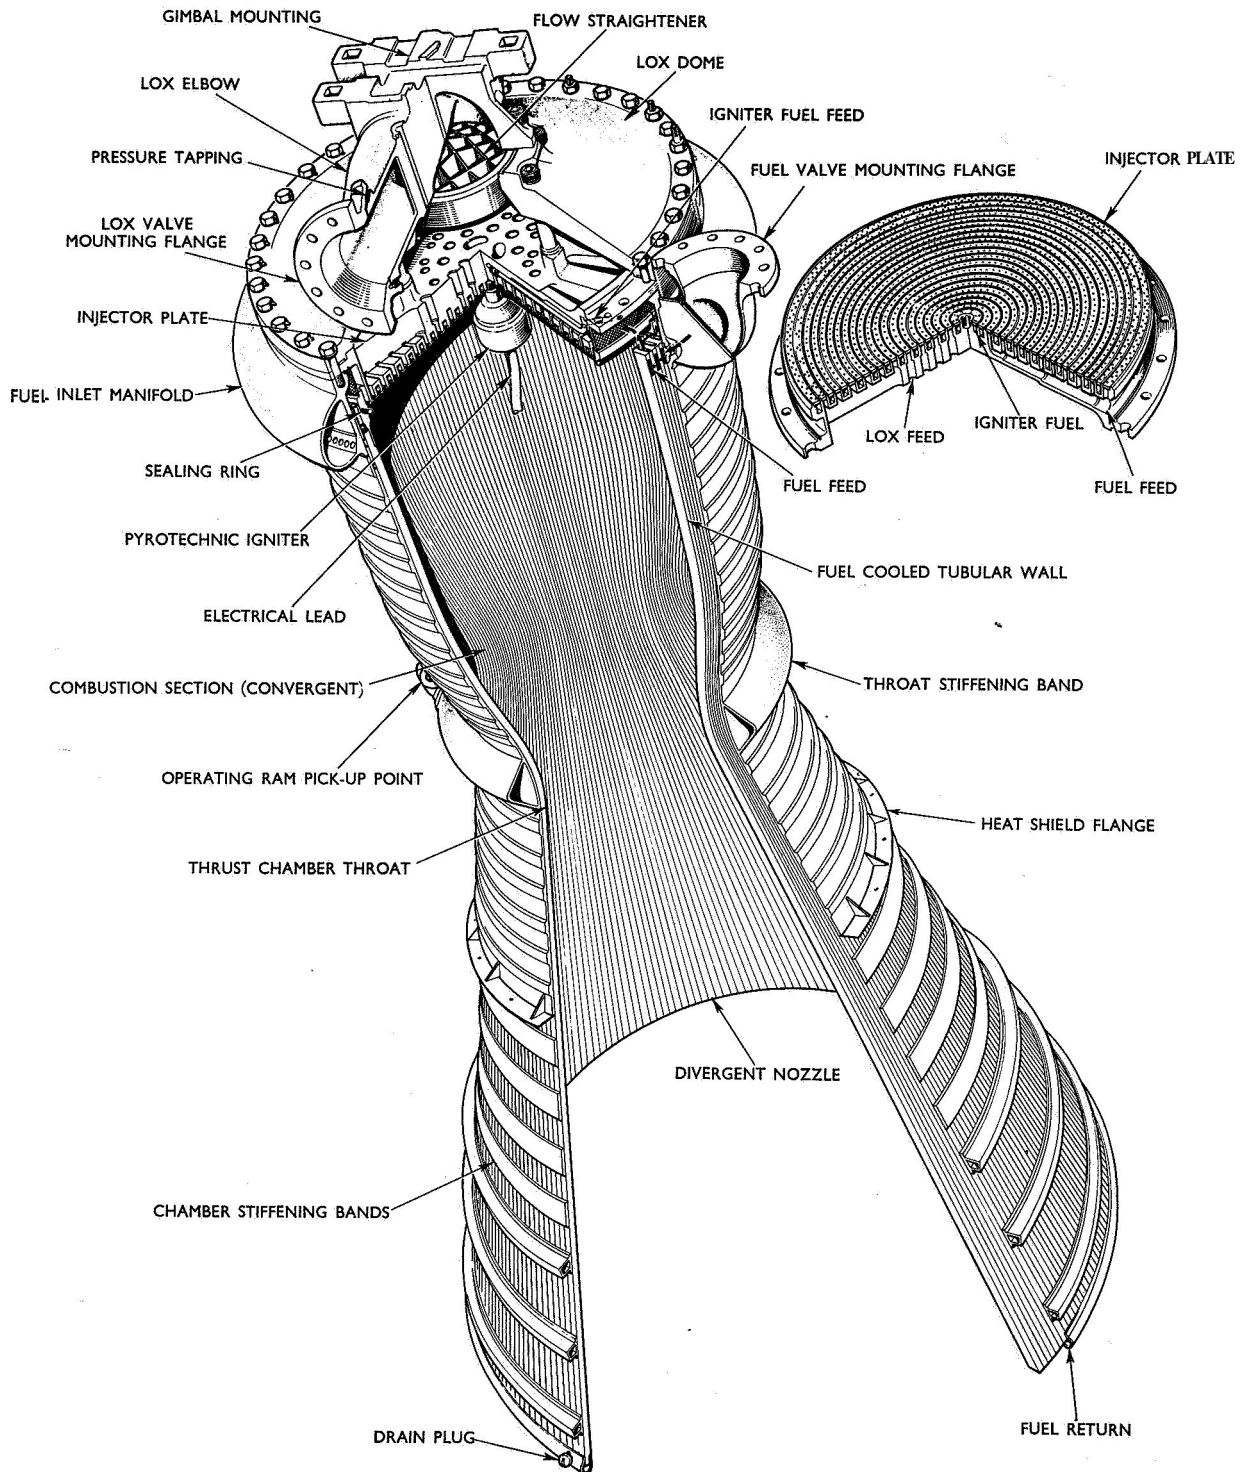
CUTAWAY VIEW OF THRUST CHAMBER OF RZ.2 ENGINE. (COURTESY ROLLS ROYCE, LTD.)
